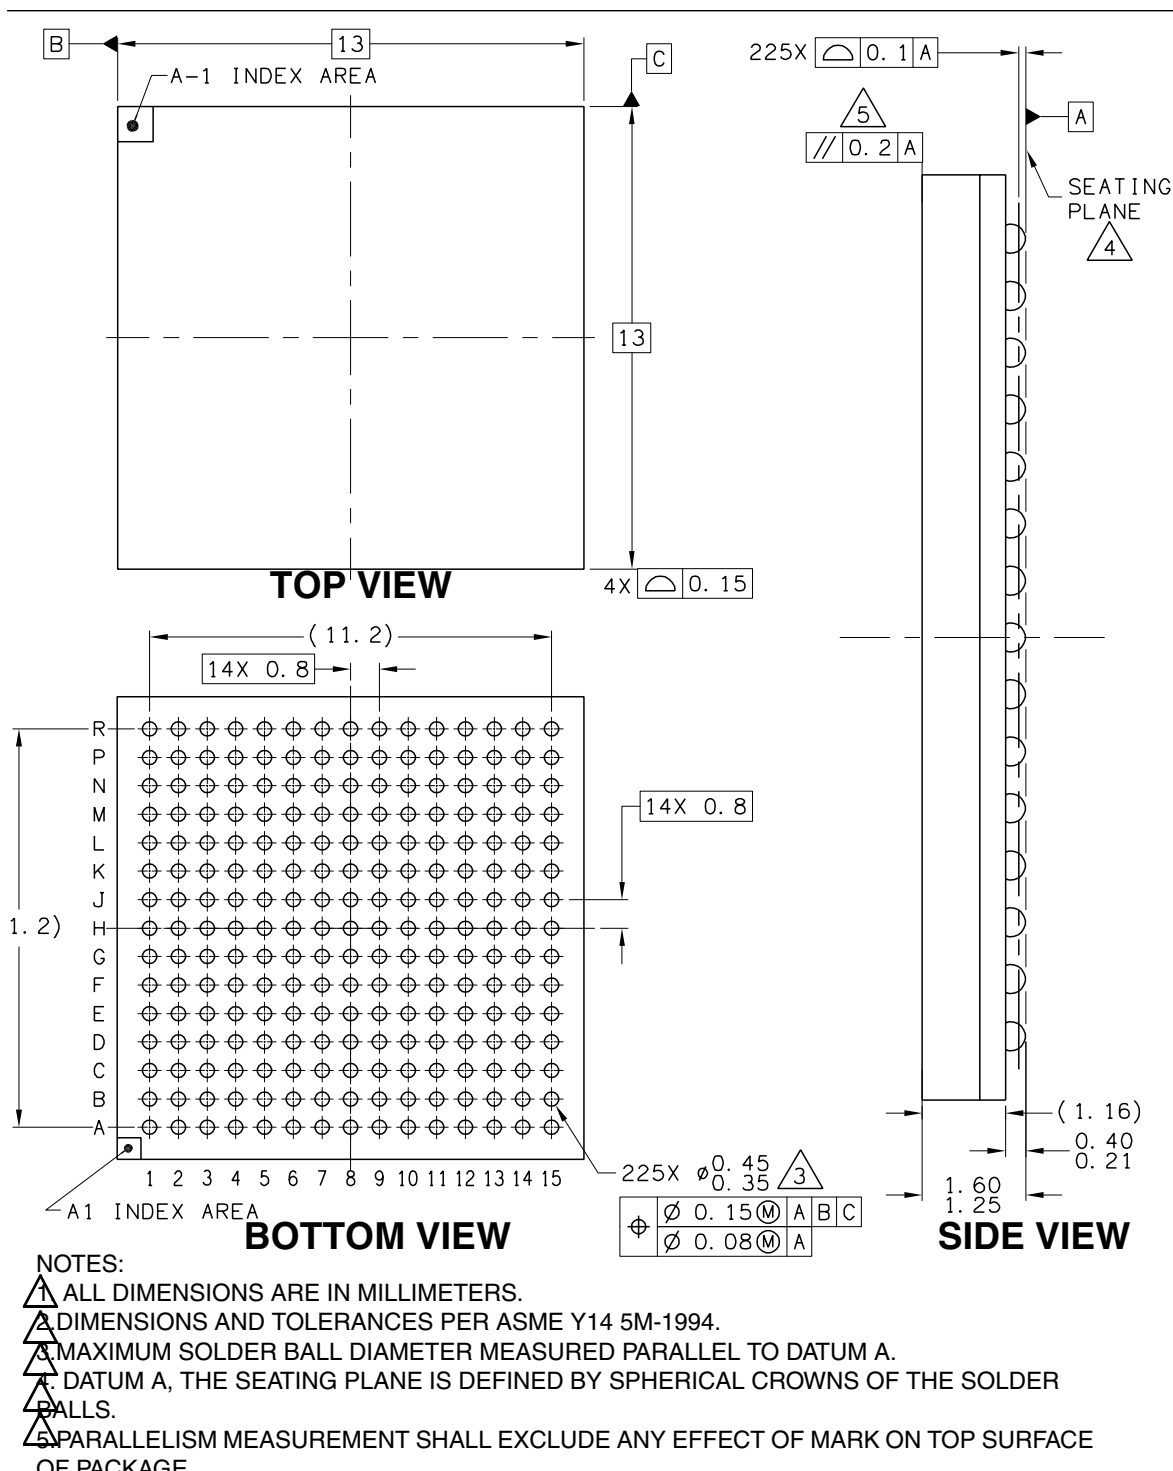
i.MXS 225 MAPBGA Mechanical Drawing
